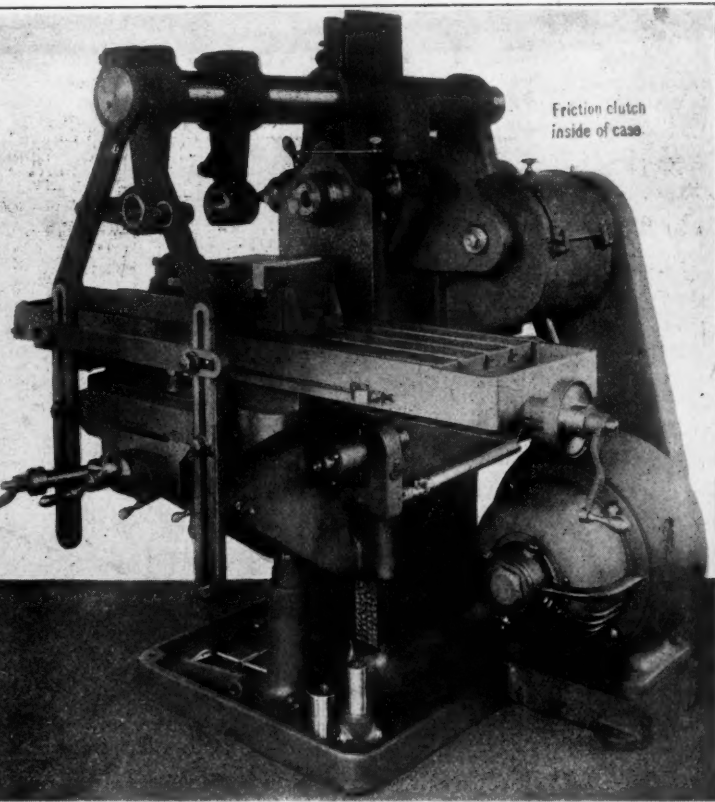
REAR VIEW OF TOOL, SHOWING ARRANGEMENT OF MOTOR AND FRICTION CLUTCH FOR THE DRIVE.
